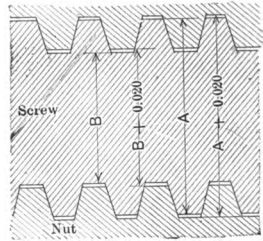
Dimensions of Thread in Screw and Nut, Acme Standard
